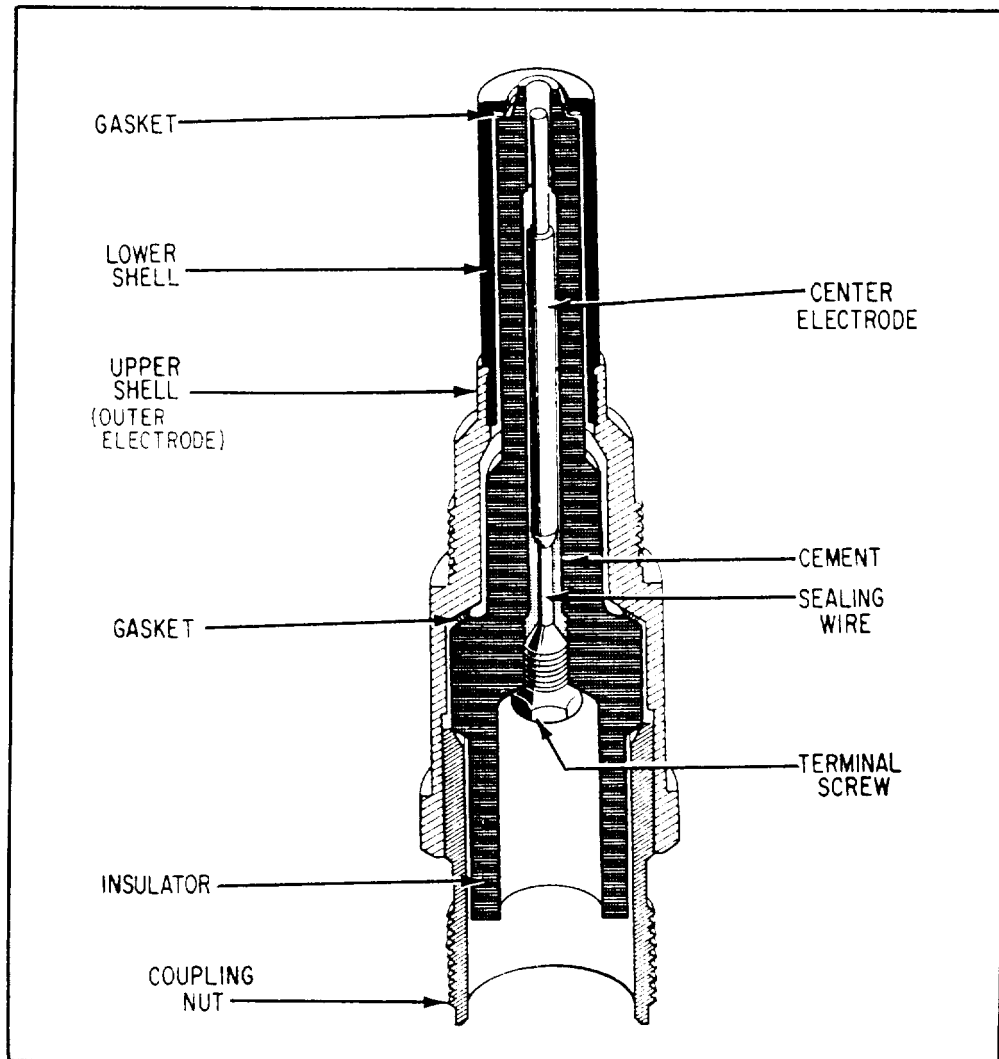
Cross-sectional view of a jet igniter plug.
